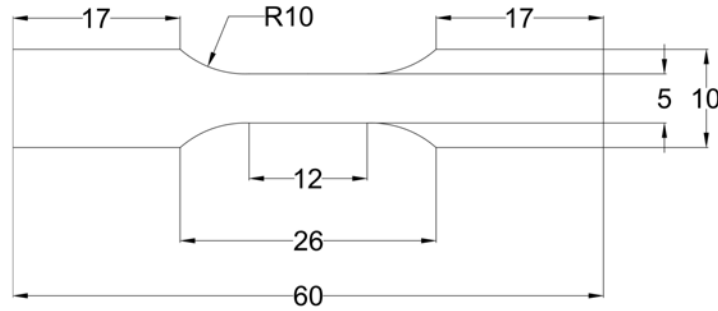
Specimen dimensions of the tensile samples, unit mm.
